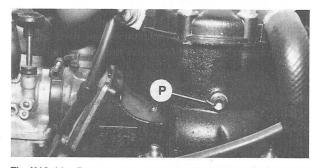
Remove plug (P) on right side of engine cylinder to completely drain cylinder water jacket.
